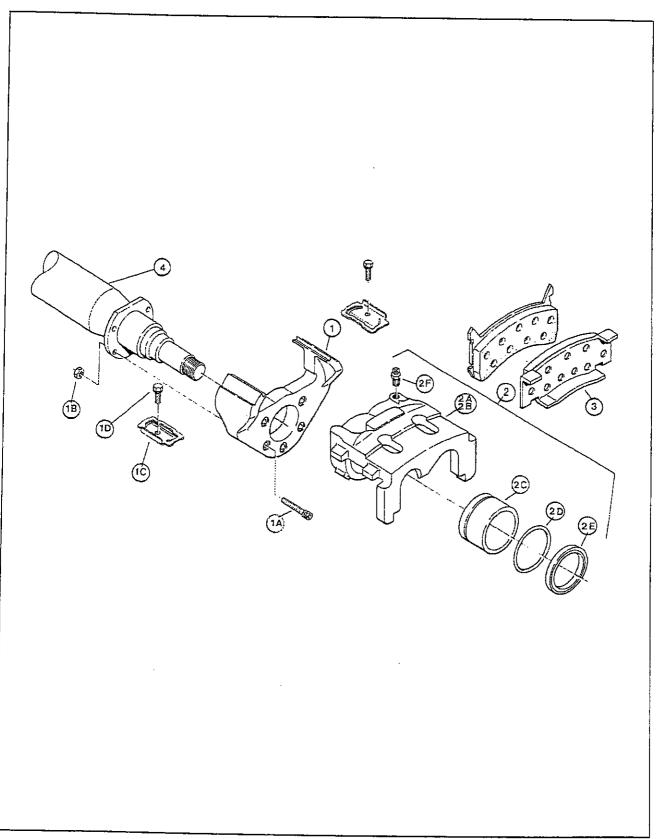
Hydraulic Disc Brake and Axle Assembly
